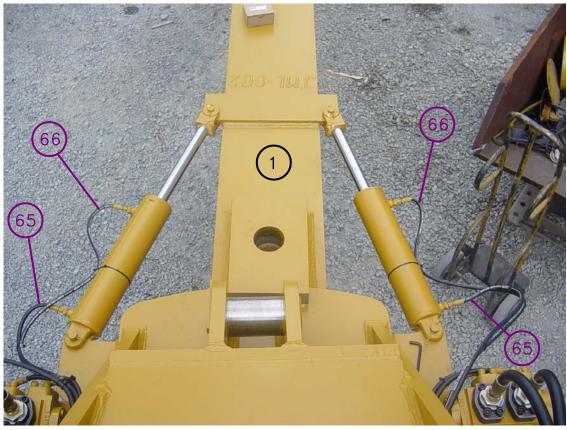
VIEW SHOWING MAST W/ TILT CYLINDERS
